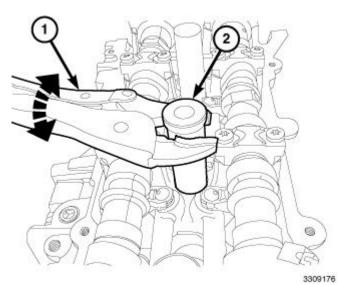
Spark Plug Tube Installer & Spark Plug Tube Courtesy of CHRYSLER GROUP, LLC
